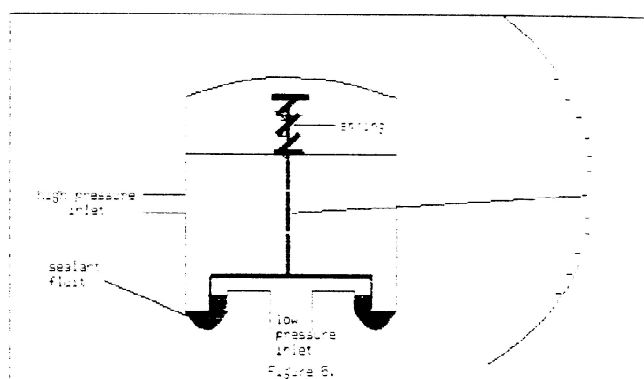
GIGI On-Line Drawing (Module MEB 5)
